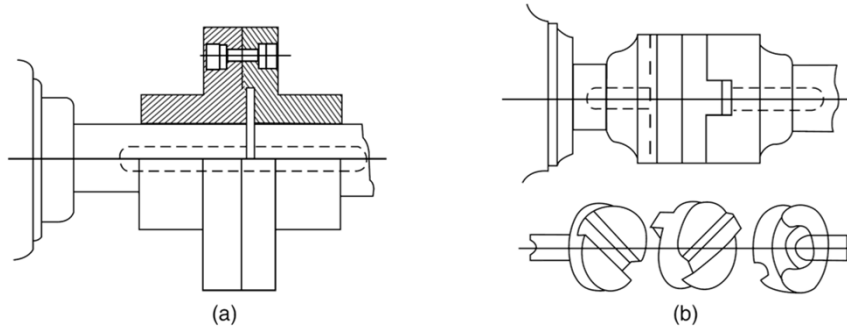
(a) Flanged coupling and (b) Oldham coupling.
